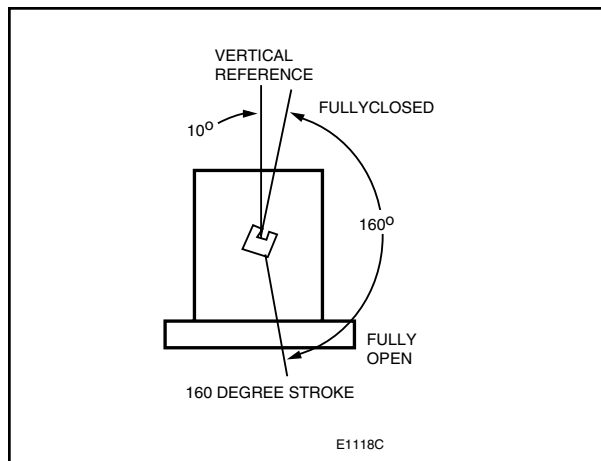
LIMITS OF MOTOR SHAFT ROTATION VIEWED FROM POWER END.
